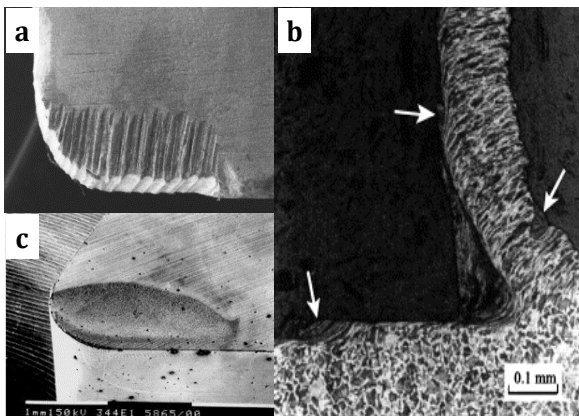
(a) Abrasive tool wear located at the tool rake face after machining titanium alloys, [1]. (b) The white arrows show deposition of material left on the workpiece after the removal of the built-up edge (white arrows) in the case of orthogonal cutting of steel with cutting speed  $V=0,5 \text{ m/s}$  and feed  $t_1=0,2 \text{ mm}$ , [2]. (c) Crater formed by diffusion process on a WC insert used for the machining of AISI 1020 steel with cutting speed  $V= 300\text{m/min}$ , [3].
